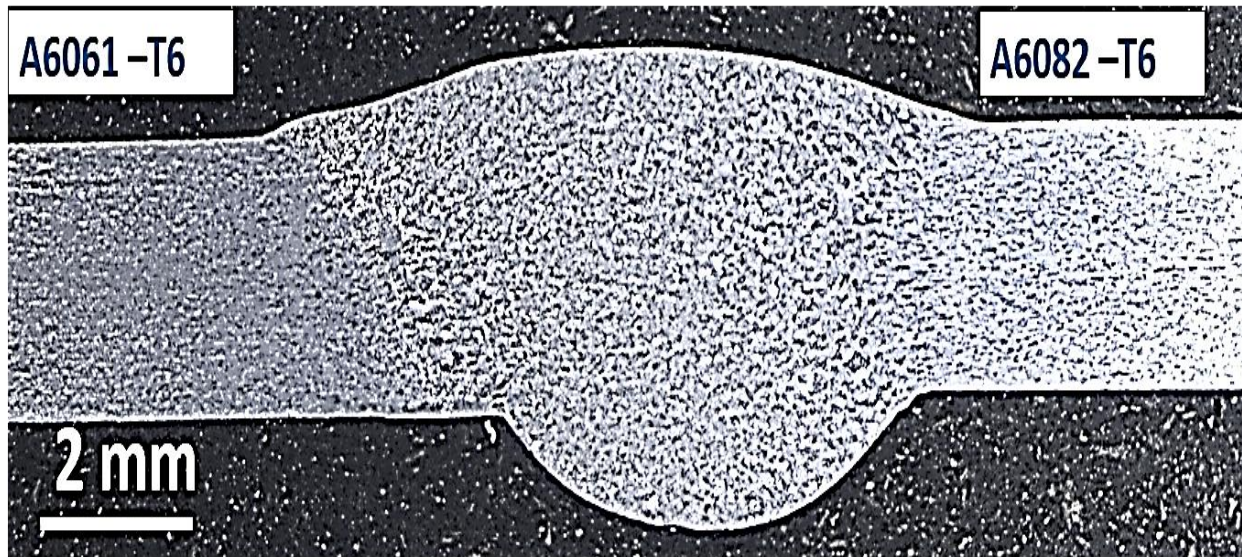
Macrostructure of transverse section of the TIG welded A6061-T6 and A6082-T6 joint using ER4043
